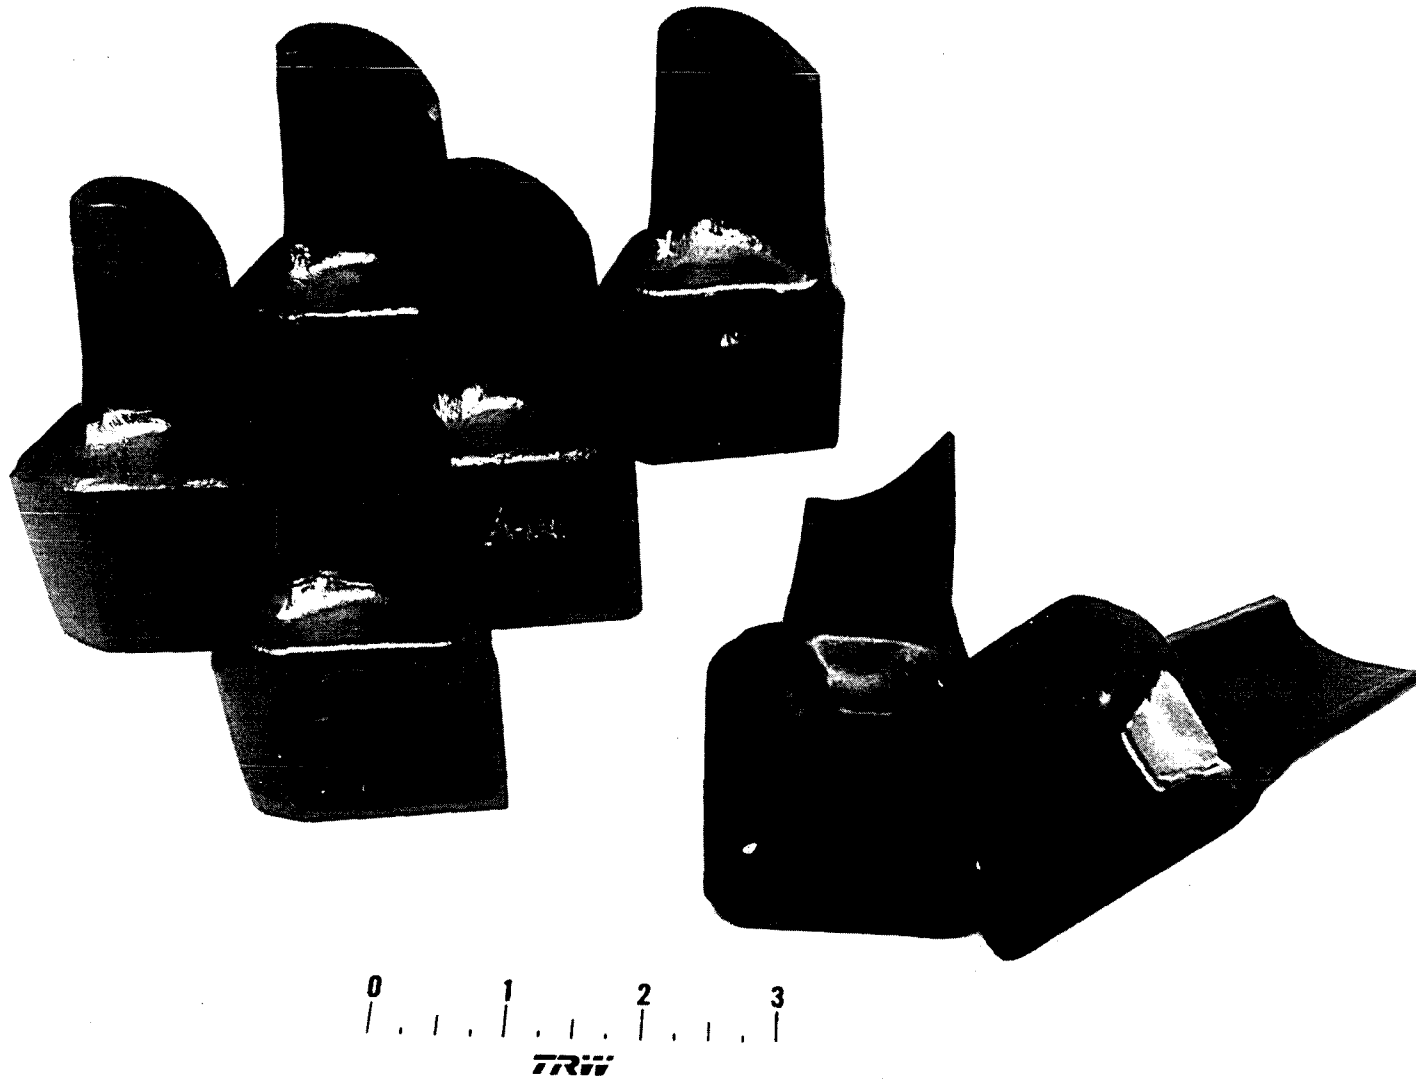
Typical Forged MA-6000 Blades Showing Hollow Section Electrical Discharge Machined.
